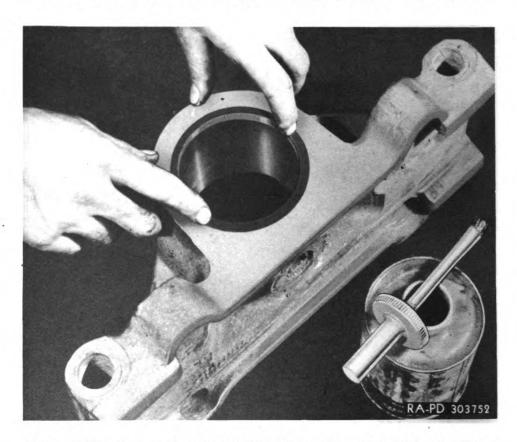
Cementing Cork Oil Seal on Inner Side of Spring Seat
